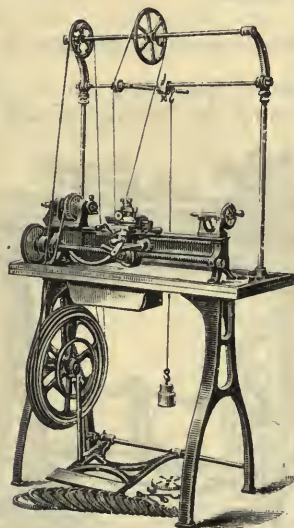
LIGHT SCREW-CUTTING LATHE, 3IN. CENTRES.
